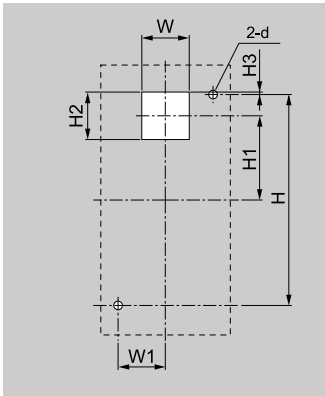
Panel Cut-Out Dimensions to Attach Outside of Control Panel
